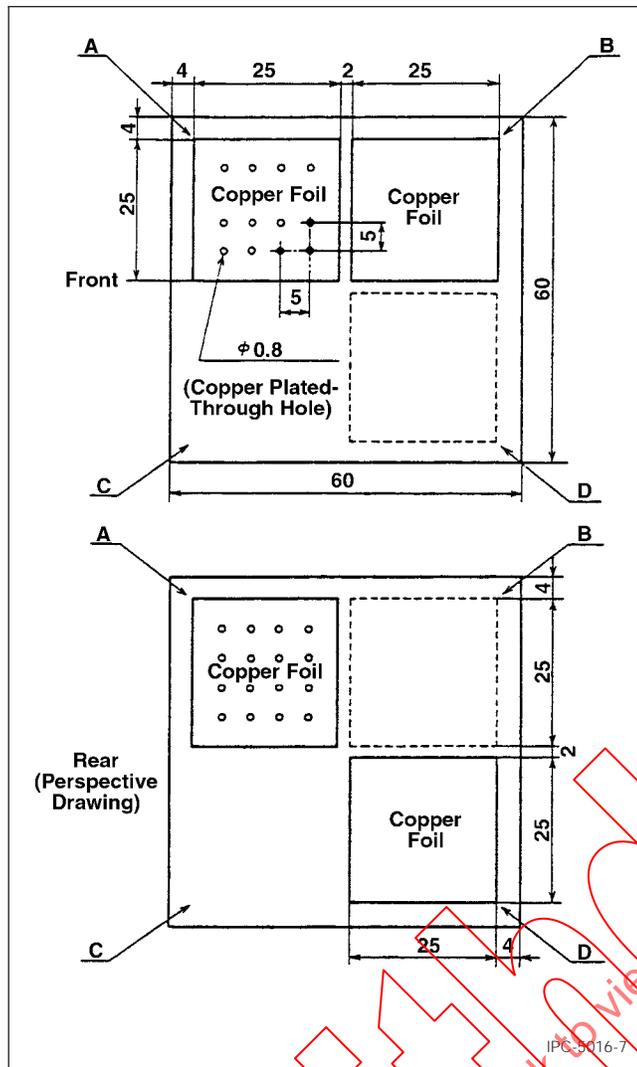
Specimen for Resistance to Soldering Heat and Resistance to Chemical (for base material, coverlay and covercoat)
